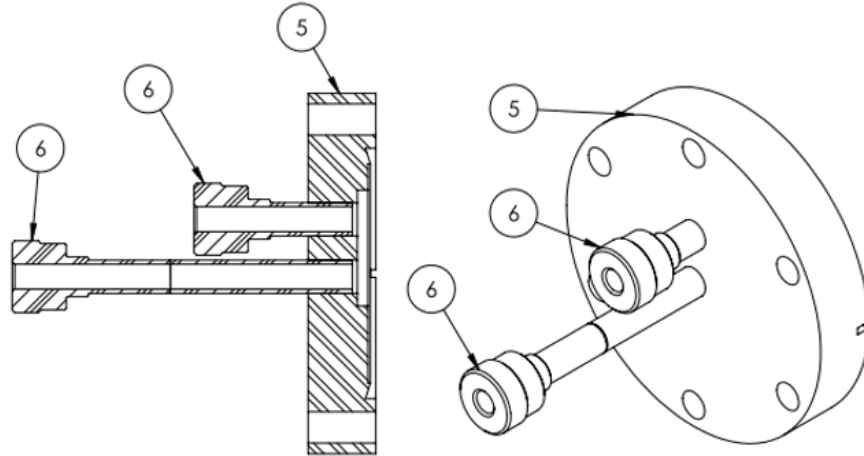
Detailed view of cooling assembly endcap. Drawings show fittings for inlet and outlet cooling water tubes (item 6).
